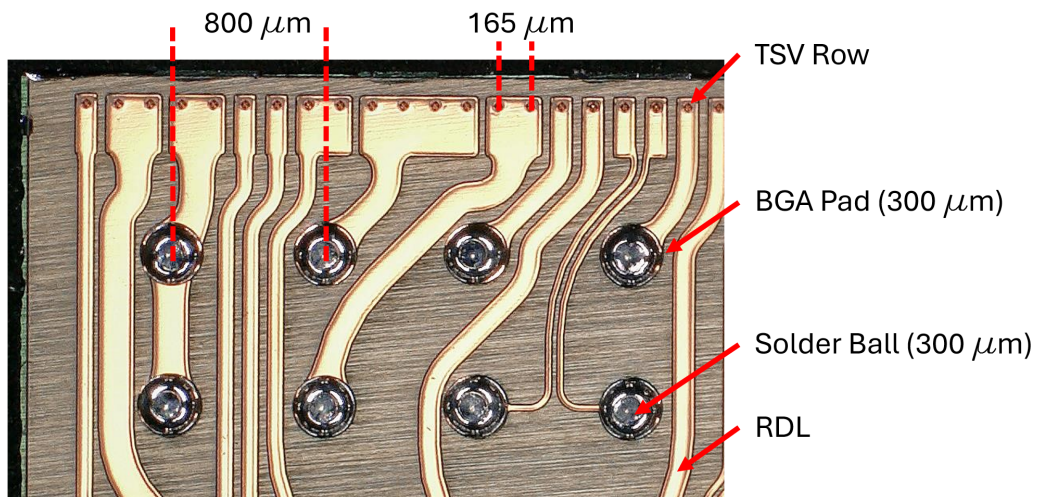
Timepix4-TSV back side, showing a row of TSVs, BGA pads and RDL. This particular sample also has solder balls, deposited on the BGA pads.
